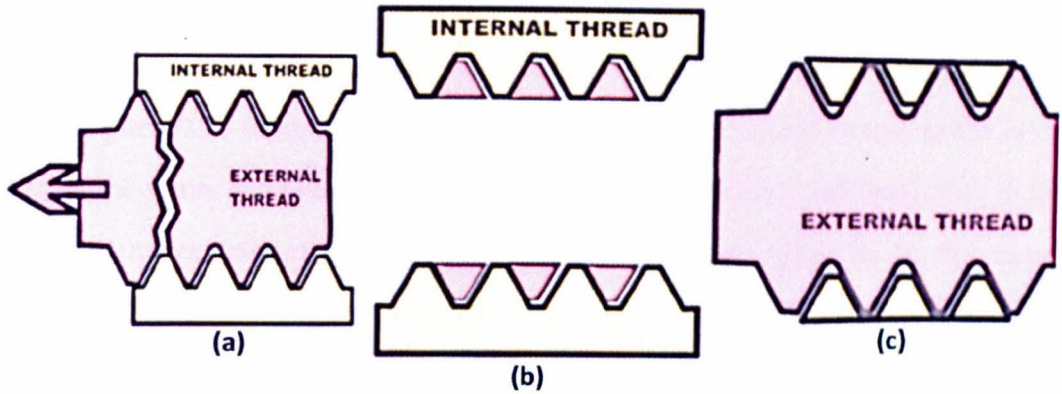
Failure modes associated with the pull-out test for the screws (a) tensile fracture at the core, (b) stripping of the external thread and (c) stripping of the internal thread [27].
